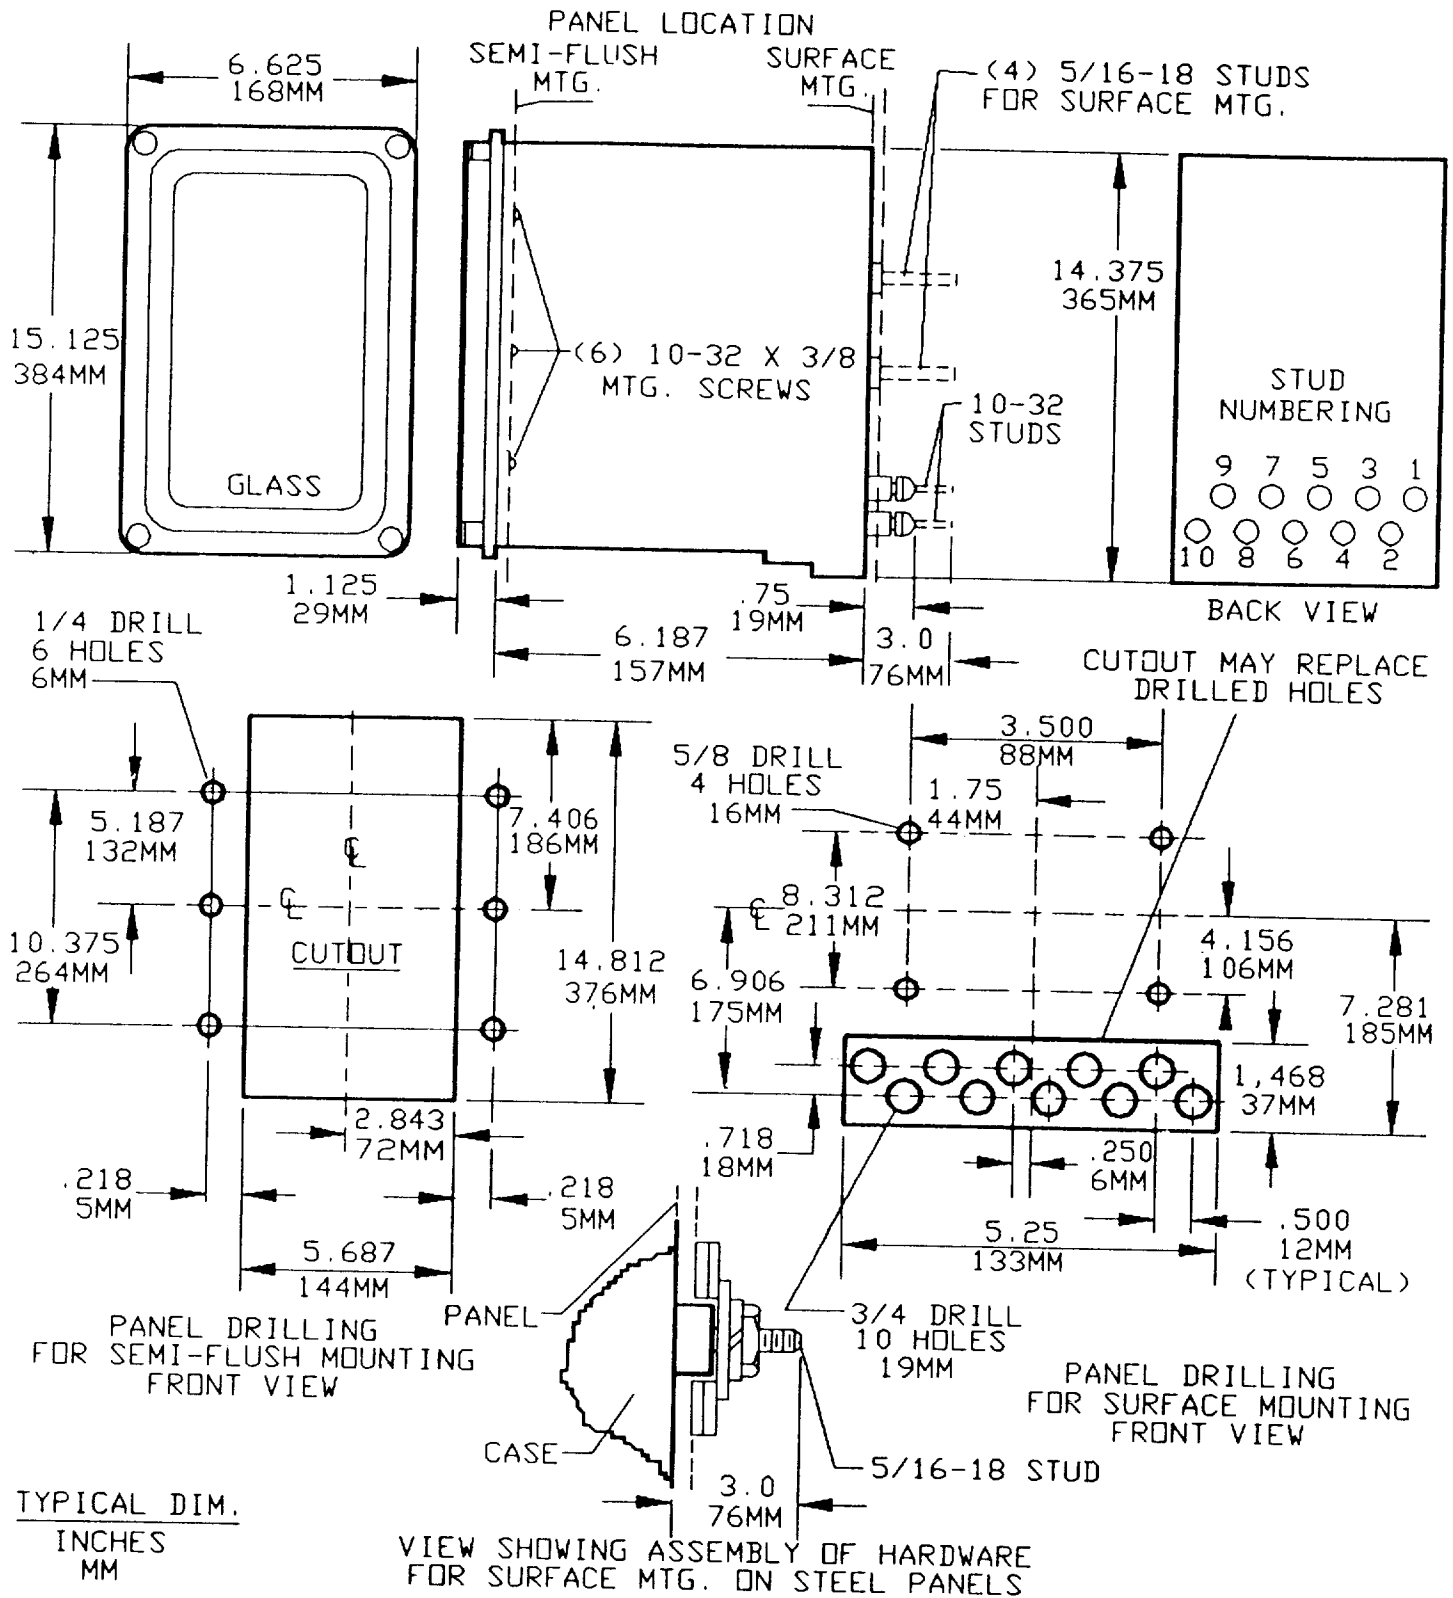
(K-6209273 [5]) Outline and Panel Drilling Dimensions for Type IBCG Relays
